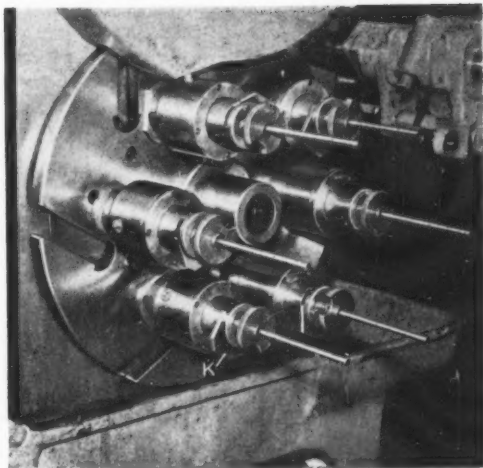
Rear View of the Machine in Fig. 6, Showing the 3-position Stops Employed when Machining the Components Shown in Fig. 5
